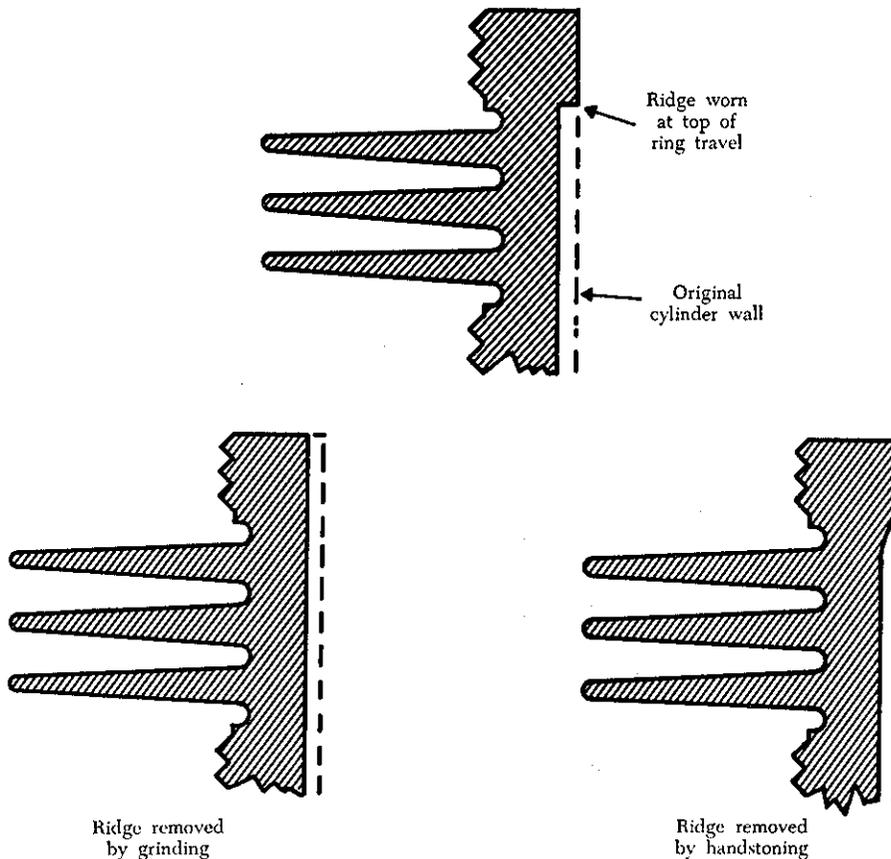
Ridge or step formed in an engine cylinder.
